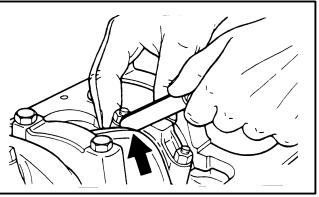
MEASURE THE SIDE CLEARANCE, CONNECTING RODS
